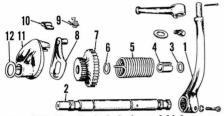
Exploded view of kick starter assembly. Gear (7) meshes with gear (11-Figs. BS2-20 and BS2-21),
